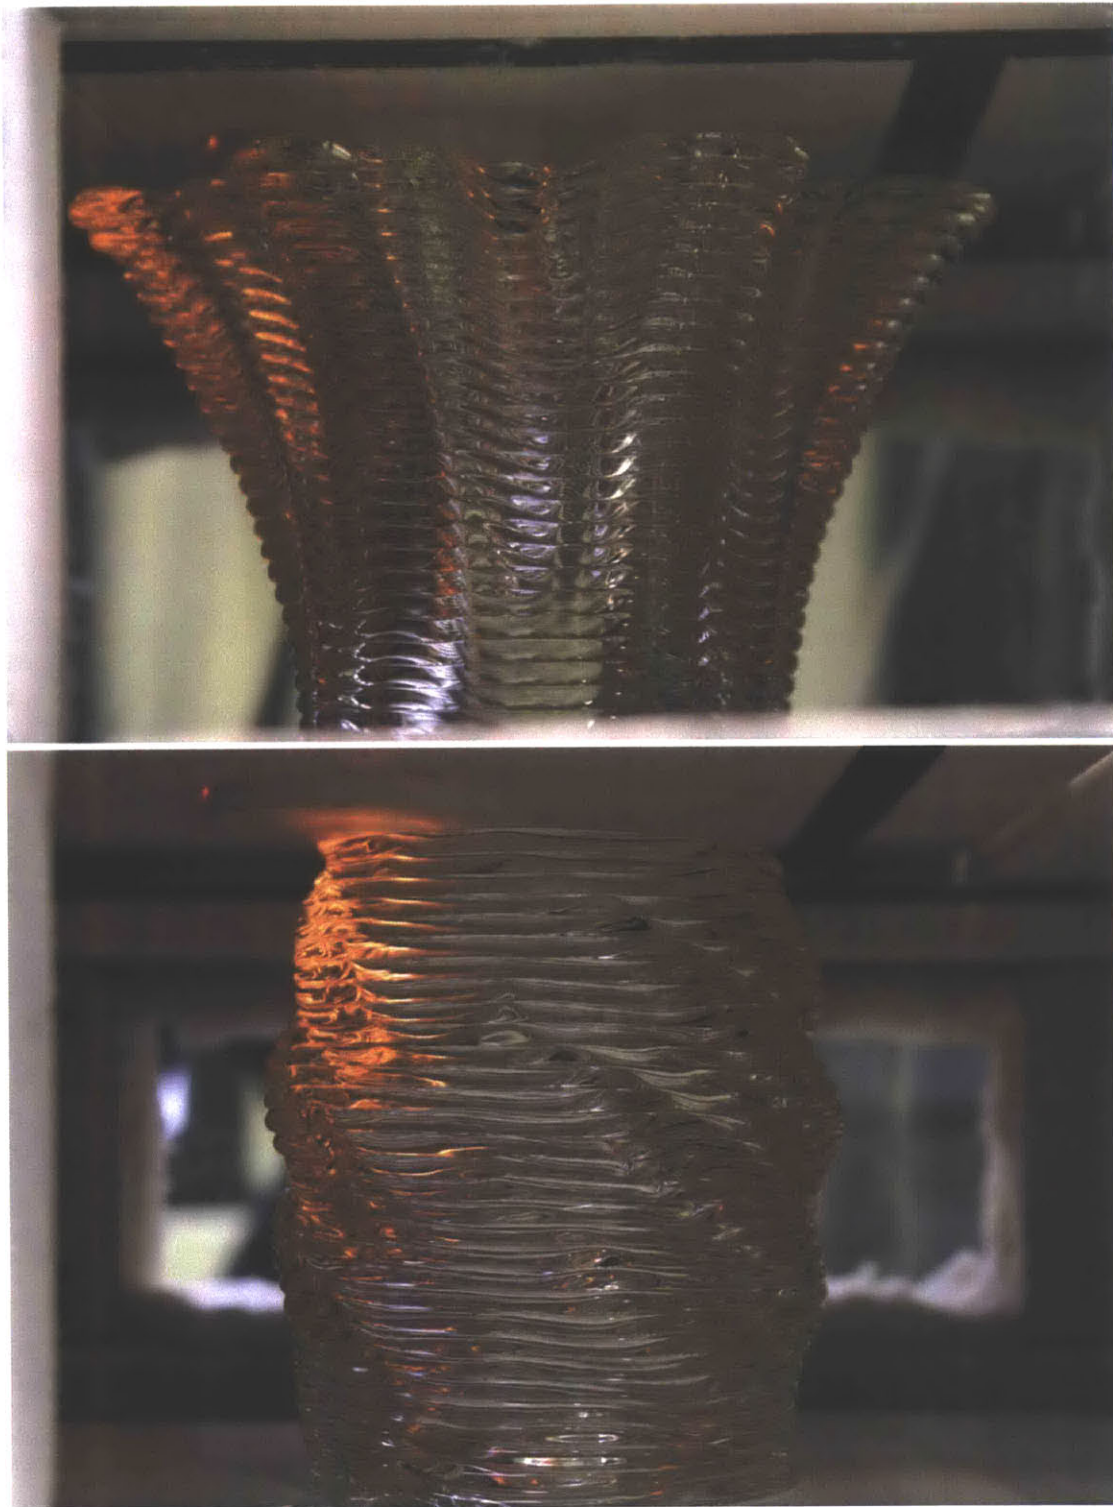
Depositing molten glass into the Print Annealer. The Print Annealer remained stationary while the Z-platform moved inside it. The Z-platform was fabricated out of a ceramic kiln shelf that enabled good initial bonding at high temperature and release at annealing temperature. The Nozzle Kiln and Nozzle can be seen in the top of both images
